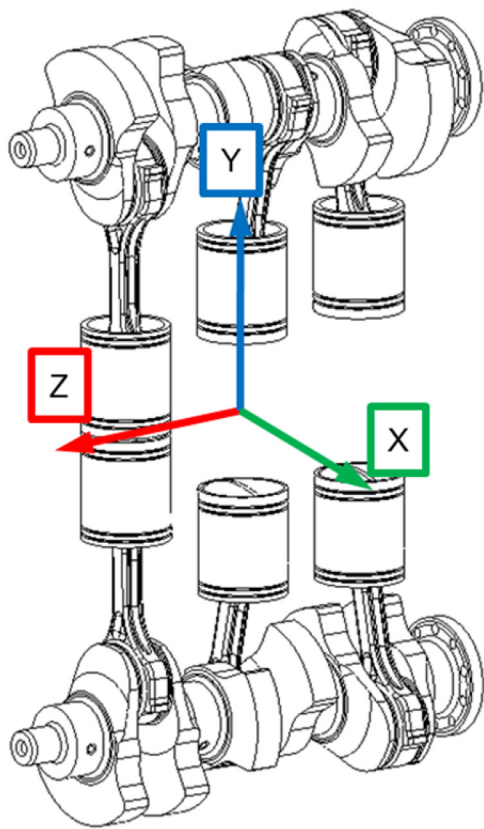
2.25L OP2S three-cylinder mechanism geometry.
